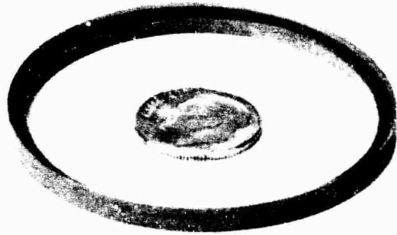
VIEW OF ROTOR CAVITY SHOWING
